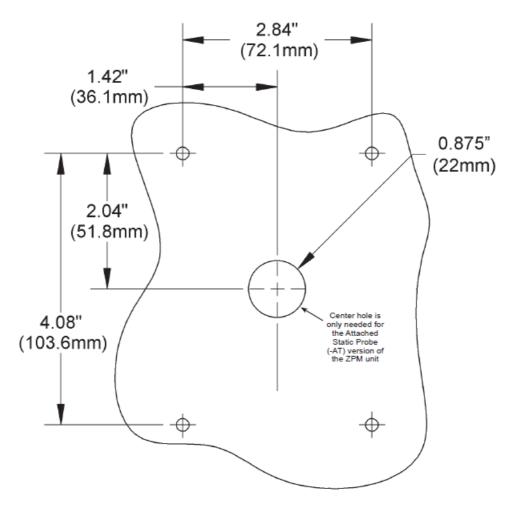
Mounting Hole Template - shown actual size (BAPI recommends creating 5/32" (4mm) pilot holes for the #10x3/4" self-tapping mounting screws.)
